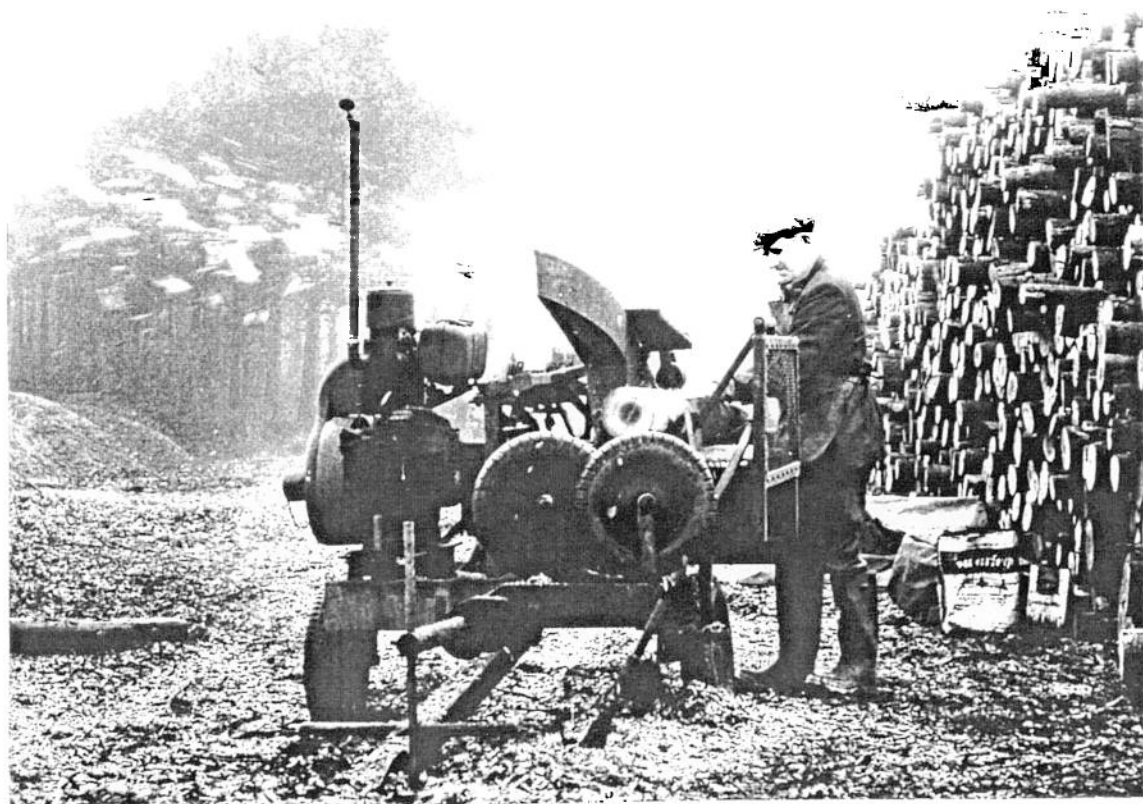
Peeling 2 metre woodwool billets, Cundey peeler.
